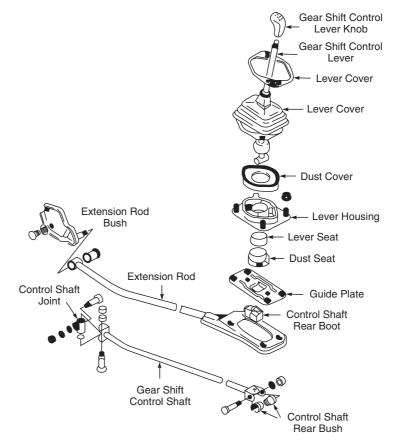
Exploded View of a Gear Shifting Control System of a Maruti 800 Car
